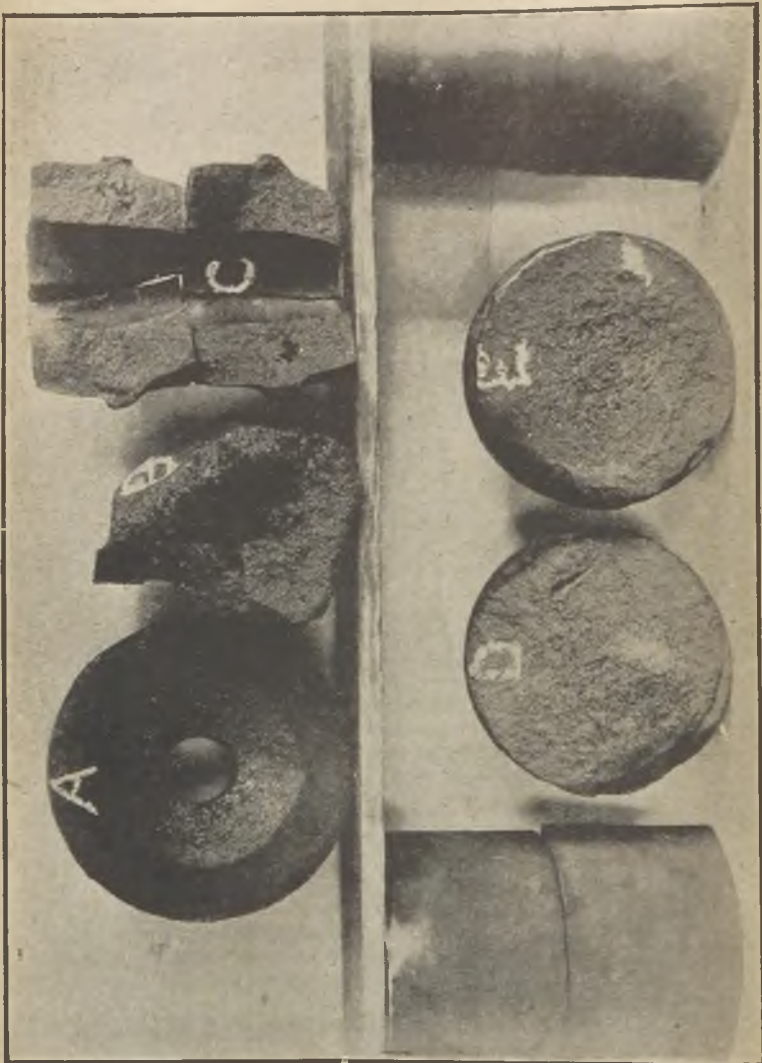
SAMPLE CASTINGS EXHIBITING DEFECTS.
